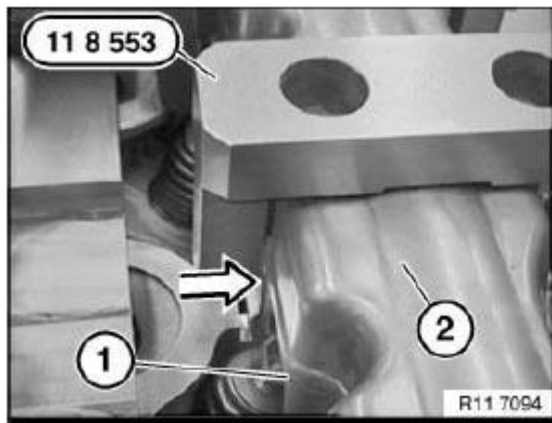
Positioning Special Tool 11 8 553 Over Bearing Banks Screw Connection
